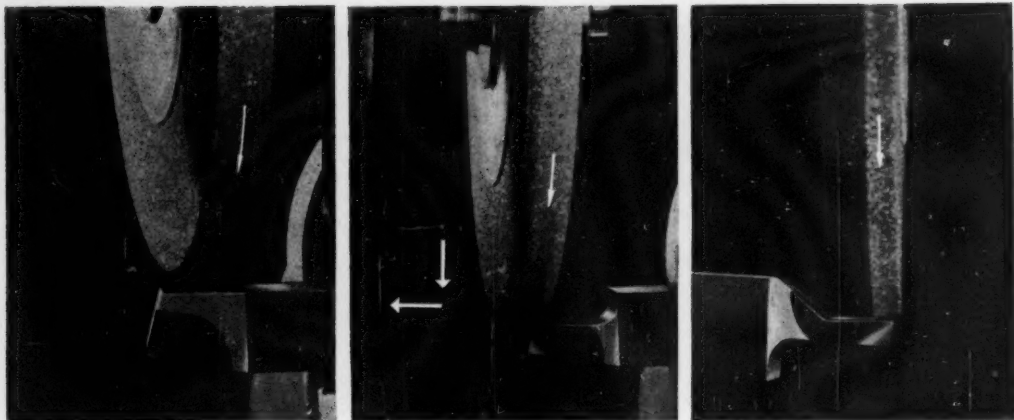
(left) The Tool is Set in a Vice at the Required Clearance Angles. Fig. 15. (centre) The Radius is Finished with a Formed Wheel. Fig. 16. (right) The Chamfer is Ground with a Formed Wheel
